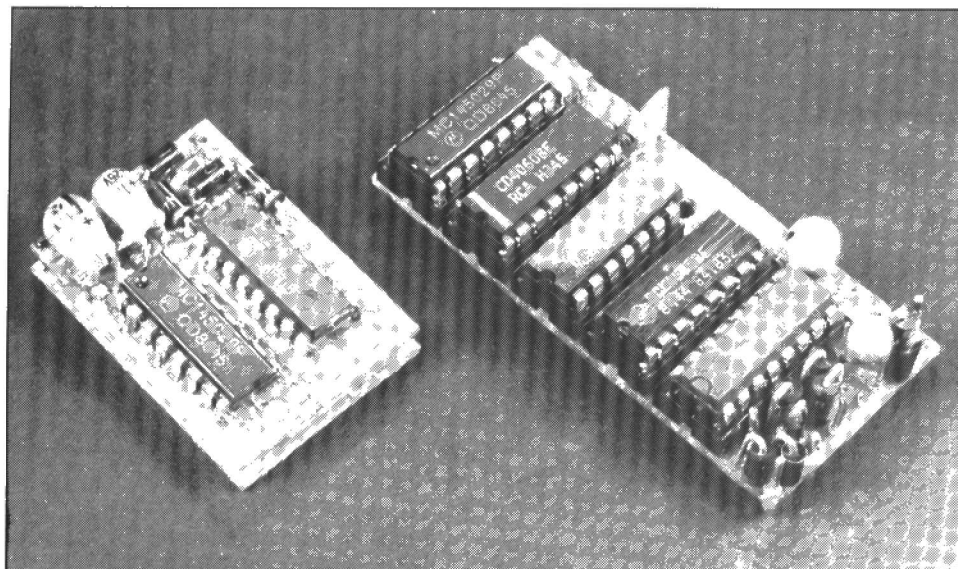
At the left the prototype locomotive decoder and two-rail adaptor sandwiched together. At the right a locomotive board constructed with conventional components, which is evidence of the space saving afforded by surface-mount techniques.
